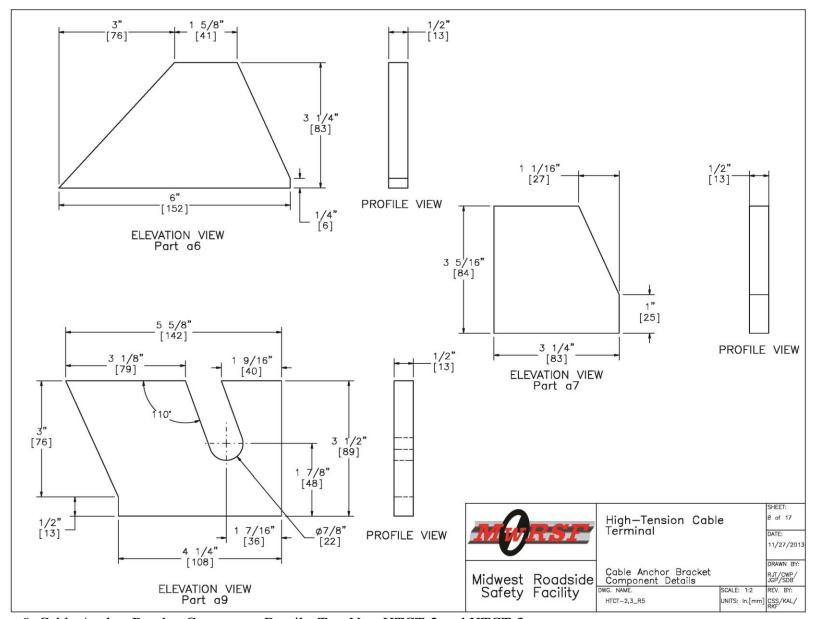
Cable Anchor Bracket Component Details, Test Nos. HTCT-2 and HTCT-3
